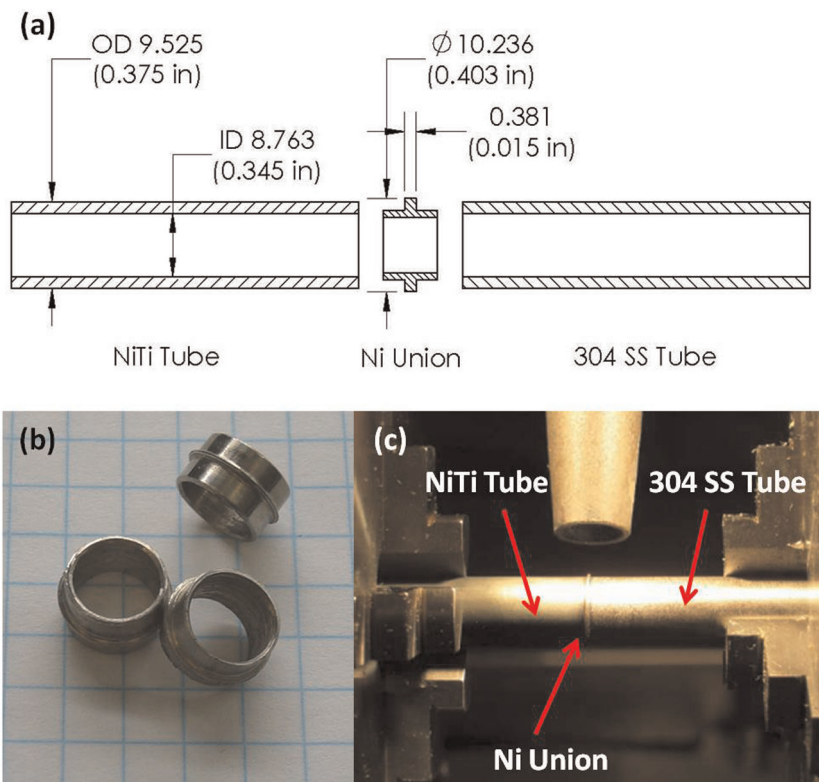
(a) Exploded diagram of thin-walled laser weld, (b) Ni union used for filler metal, and (c) assembled specimen in welding fixture.
